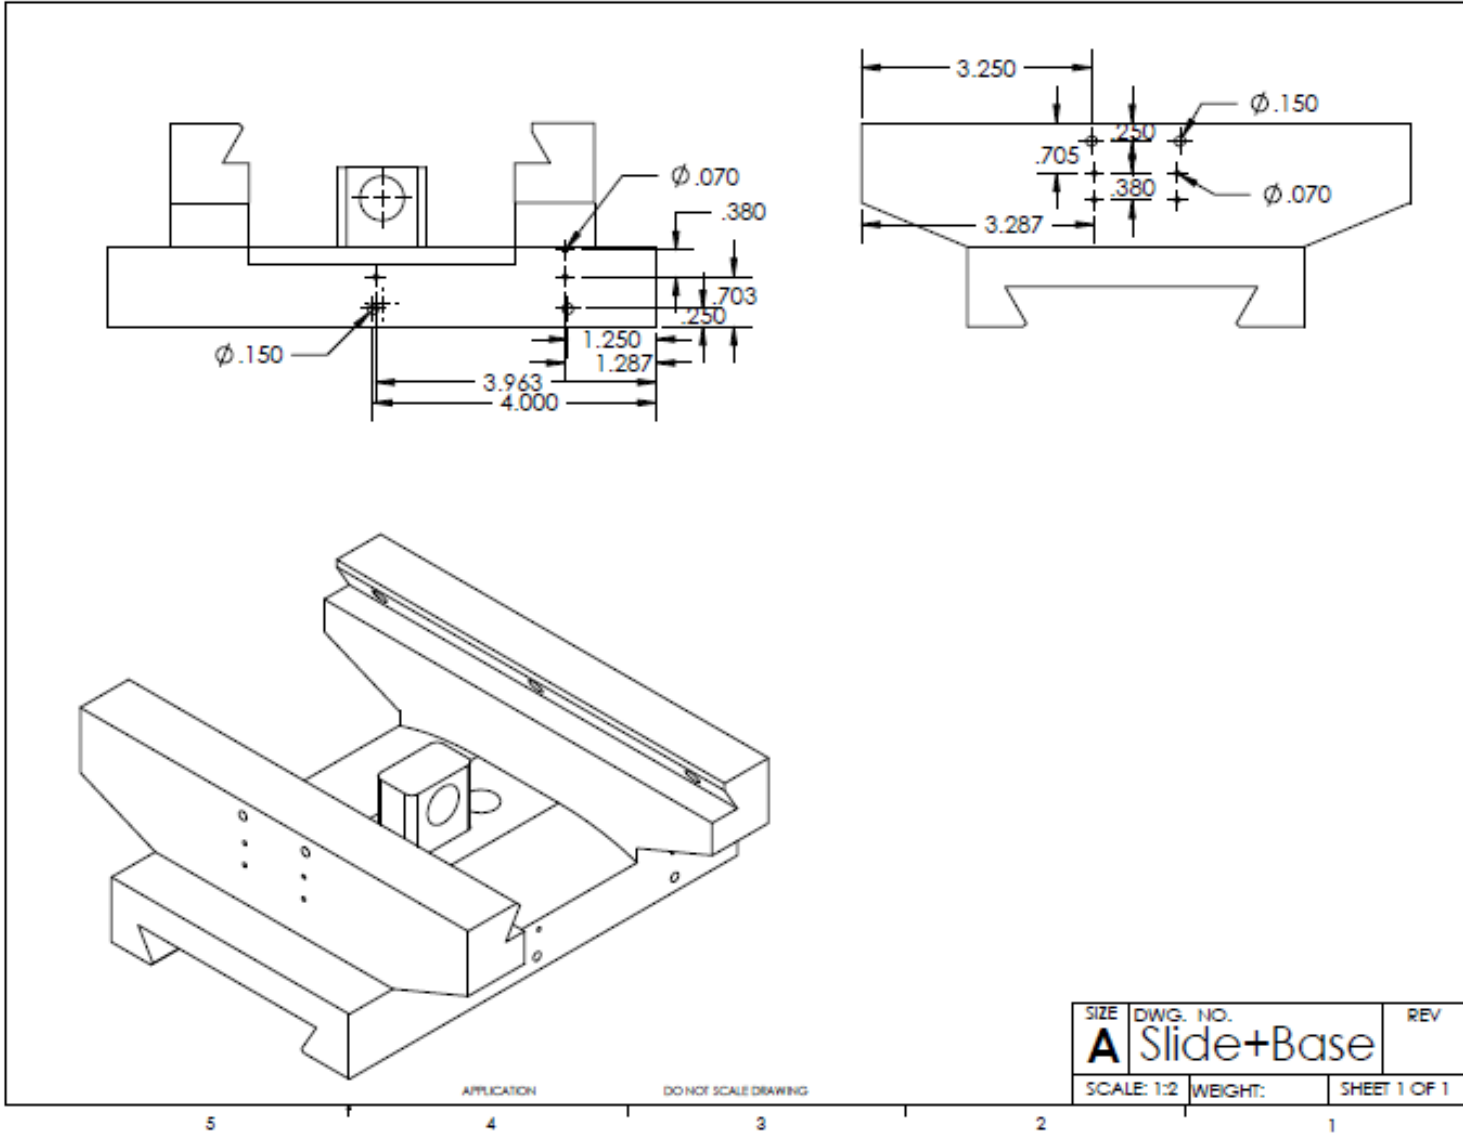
Engineering drawing of the revisions needed on the slide base for limit switches
